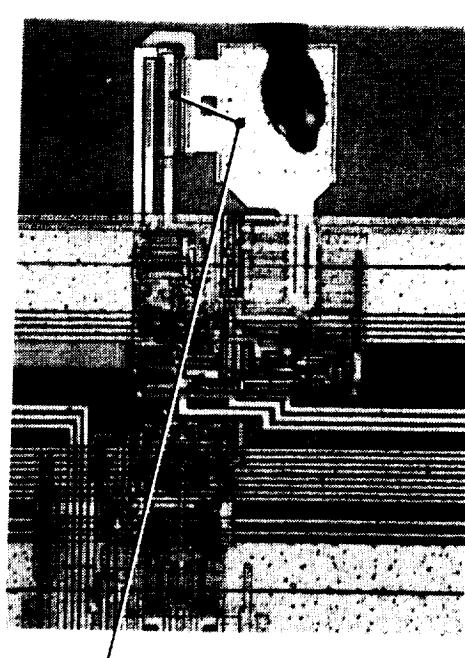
3.5X view of exposed package cavity with PAL chip and lead frame with wire bonds to chip pads.
